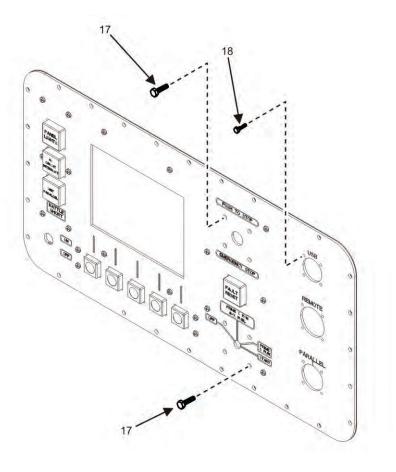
DCS Control Panel Assembly (Sheet 3 of 6).
